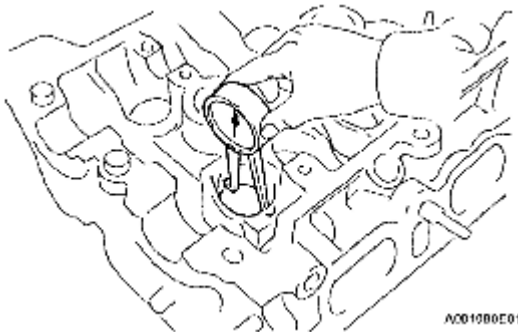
Measuring Lifter Bore Diameter Of Cylinder Head
